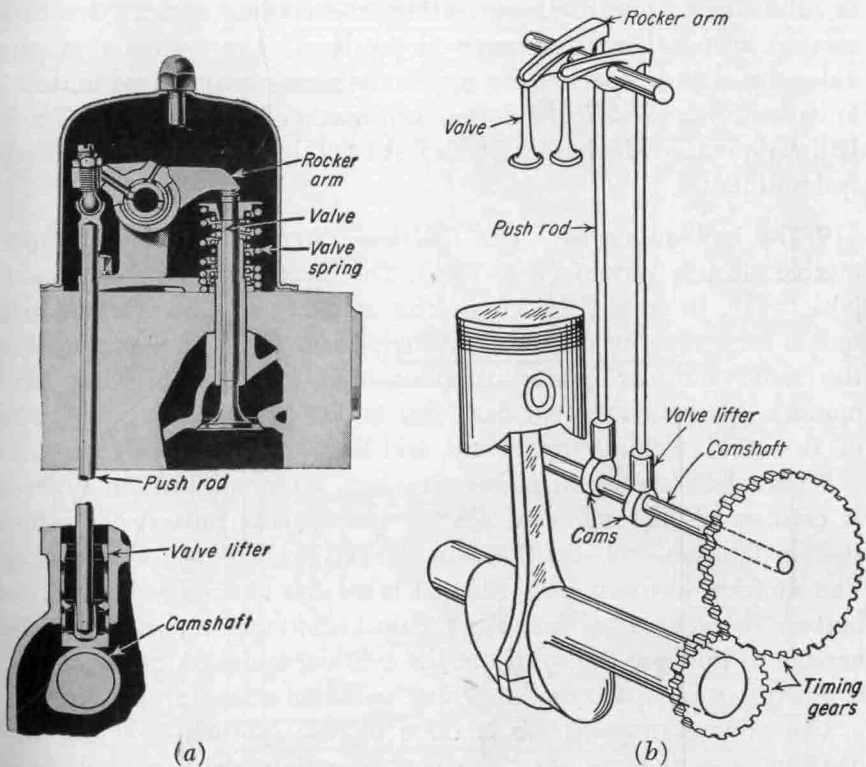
Valve-operating mechanism for an I-head, or overhead-valve, engine. Sectional view of an actual engine is shown in (a). In (b) only the essential parts are shown, including the gears to drive the camshaft from the crankshaft, the valve lifters, push rods, rocker arms, and valves for one cylinder. (Buick Motor Division of General Motors Corporation)
